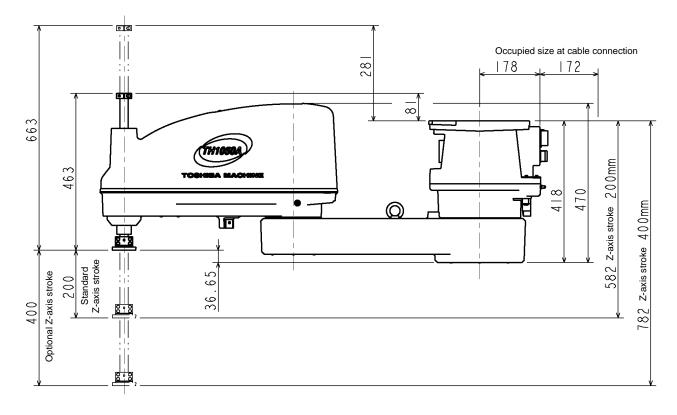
Outer dimensions of the robot (TH1050A-T)
